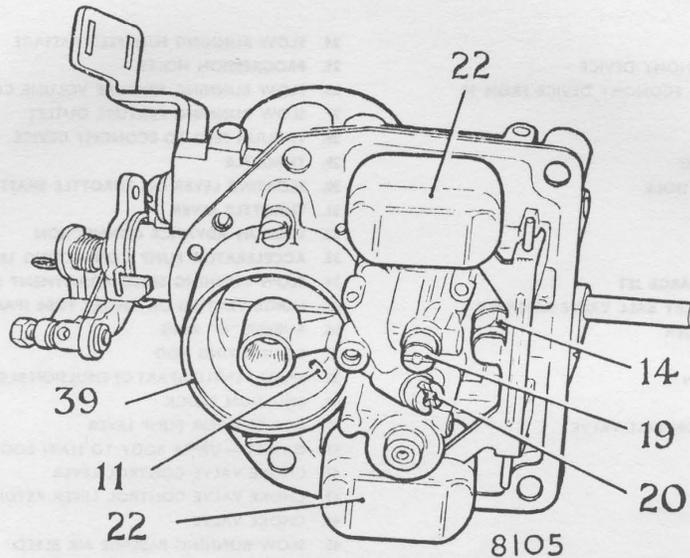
Top cover removed showing emulsion block and floats in position, main jet and compensating jet
